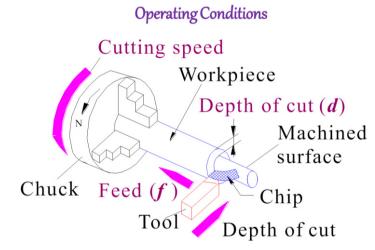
Parallel turning indicating operating conditions on the lathe machine
